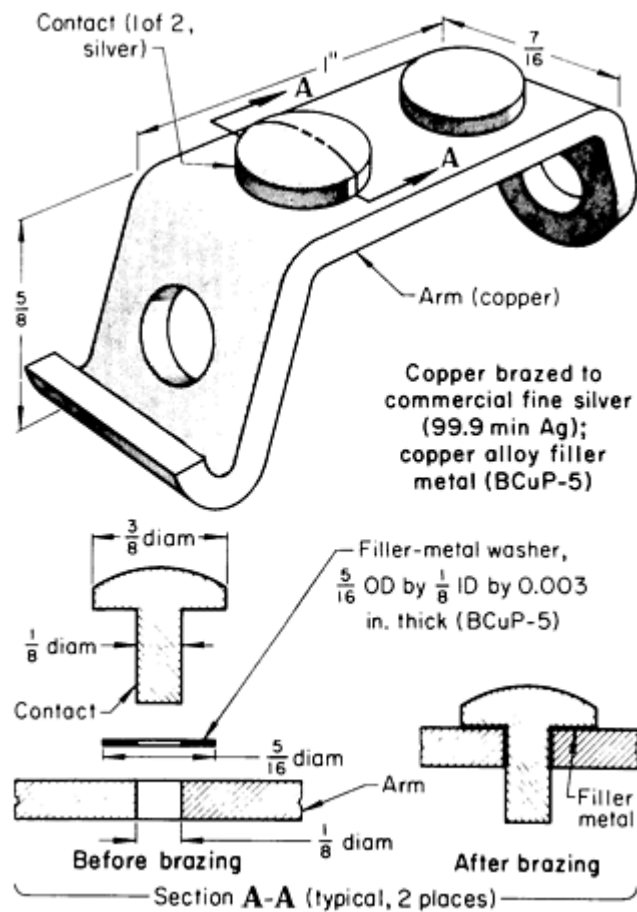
FURNACE BRAZED CONTACT ARM ASSEMBLY, BRAZED WITHOUT PROTECTIVE ATMOSPHERE, 42 °C (75 °F) BELOW THE LIQUIDUS OF THE FILLER METAL
